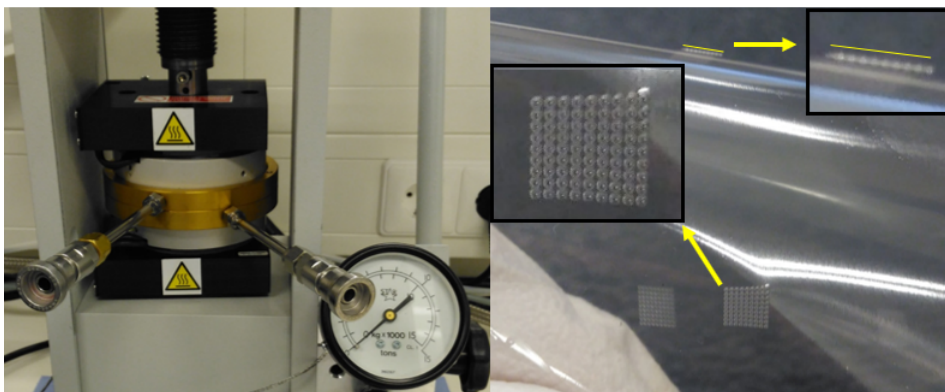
Part of the thermoforming machine set up: brass plates assembled with mould and PC film docked inside and mechanical pressure meter (left); Thermoformed PC membrane. Full cavities array and side view zoomed in (right).
